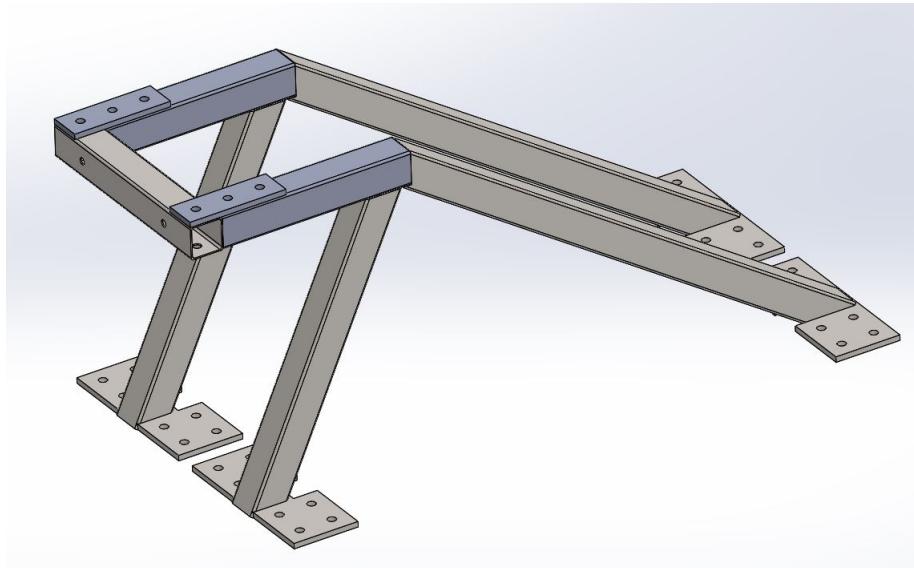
Truss thrust take out made of cut and welded steel members-bolted to the trailer frame
